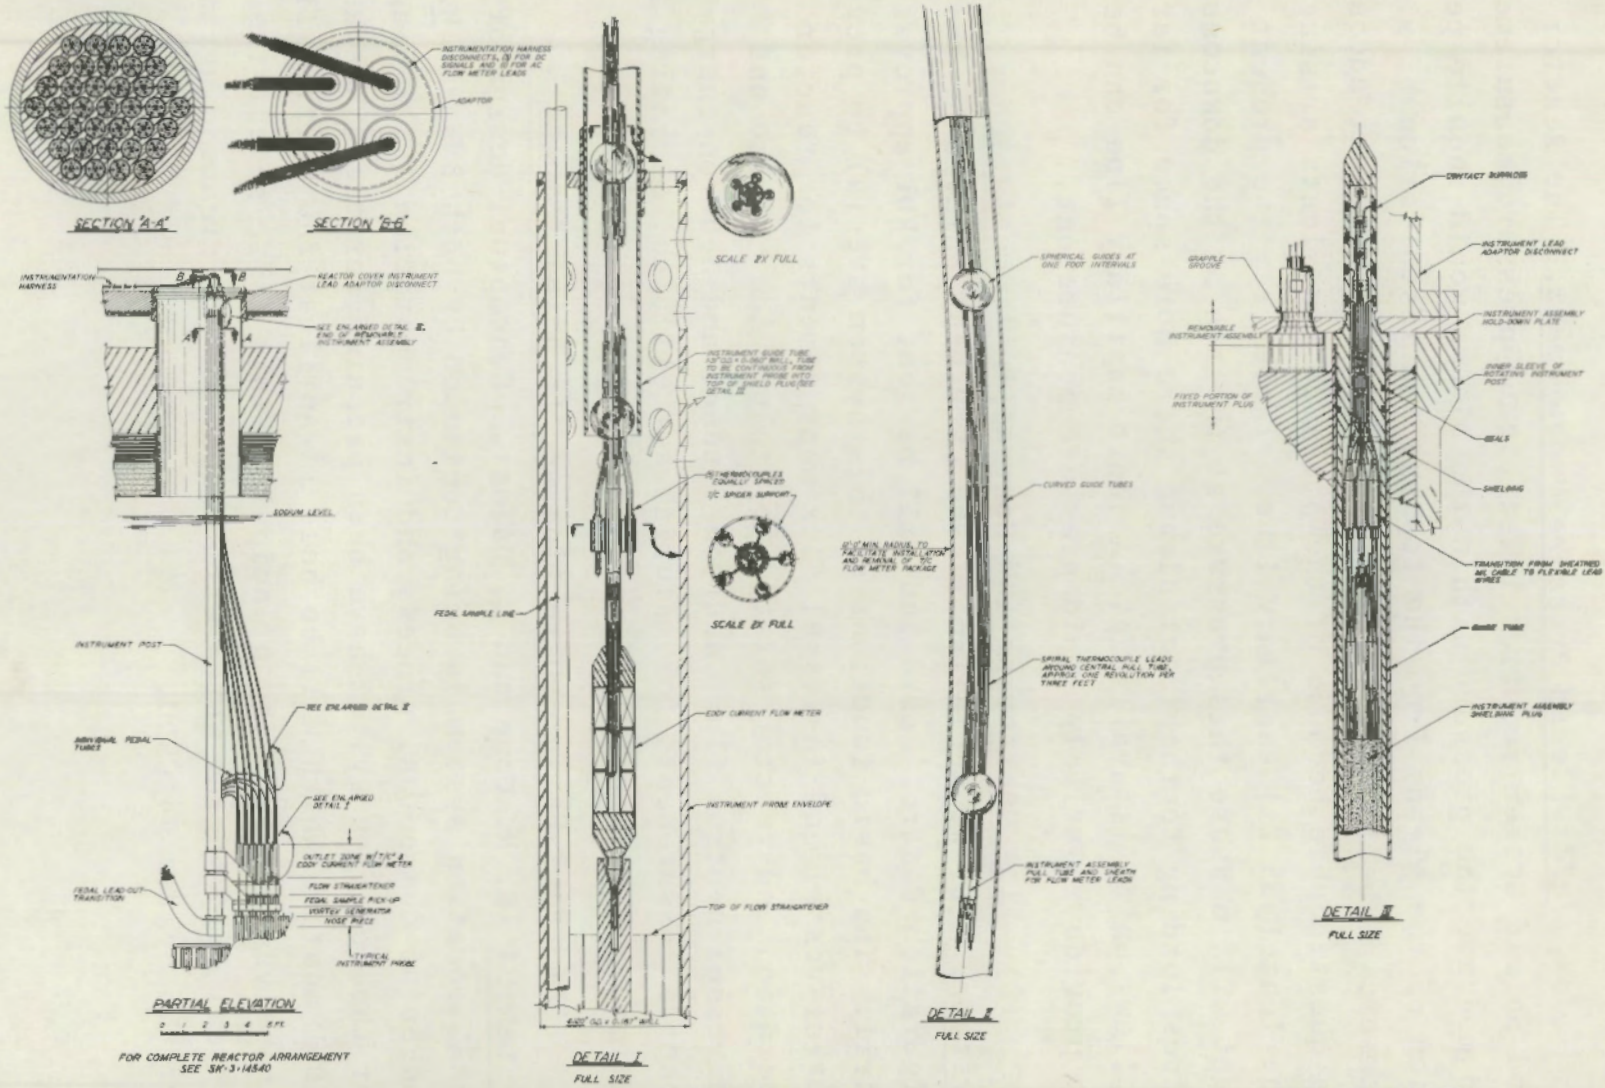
A.1. Removable Instrument Assembly Driver Fuel Position
